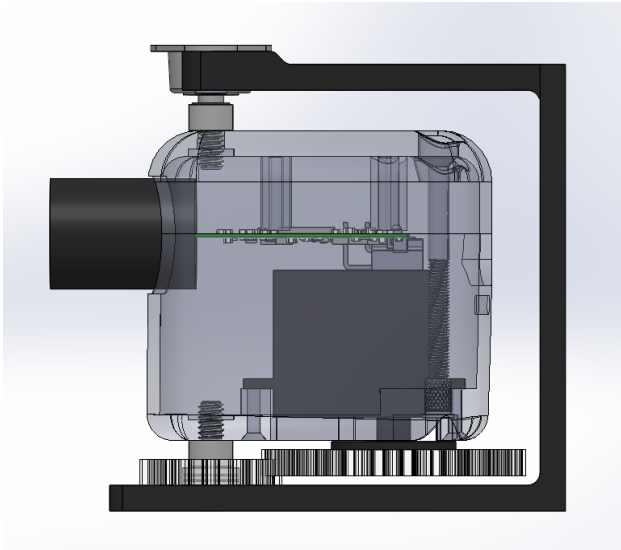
A side-view of the internal mechanical design of the Laser Rangefinder. This design was used for 3D printing.
